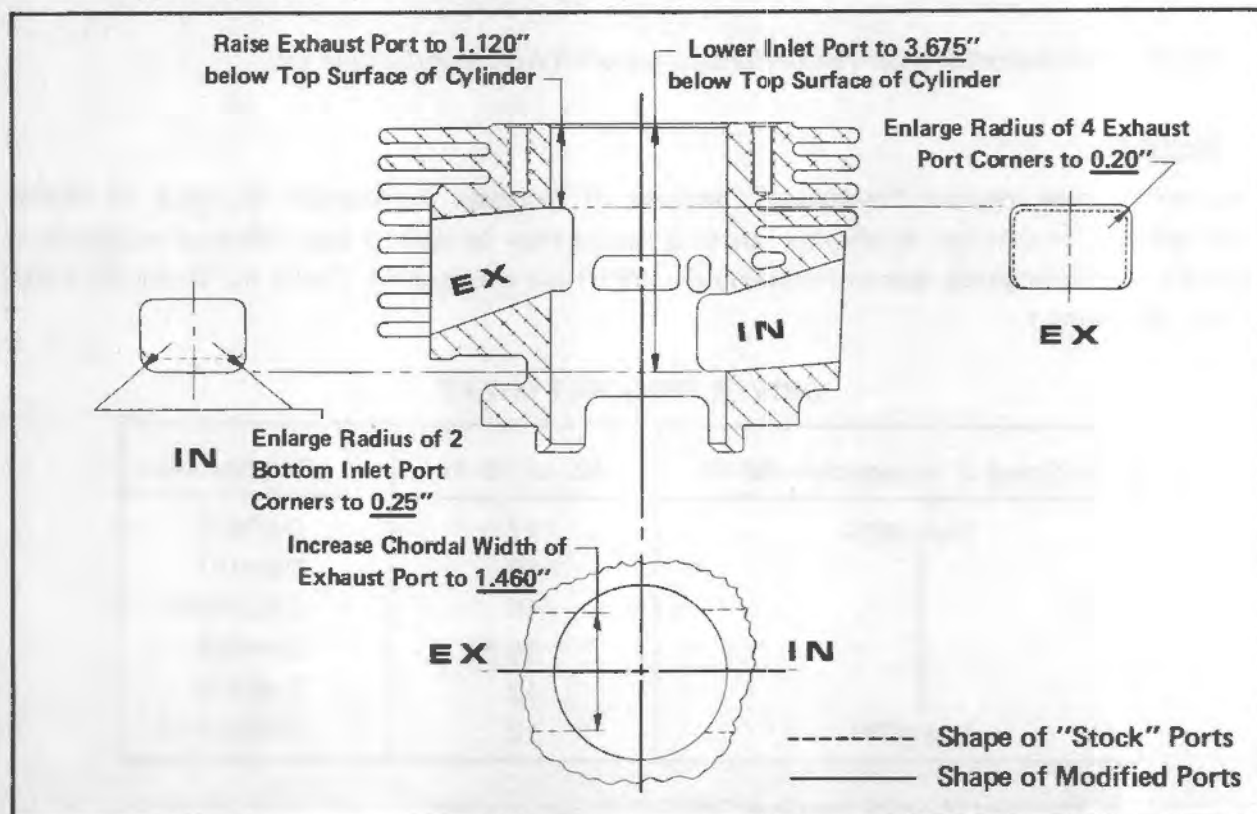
340 S/T "Modified-Stock" and "Super-Modified" Cylinder Dimensions
